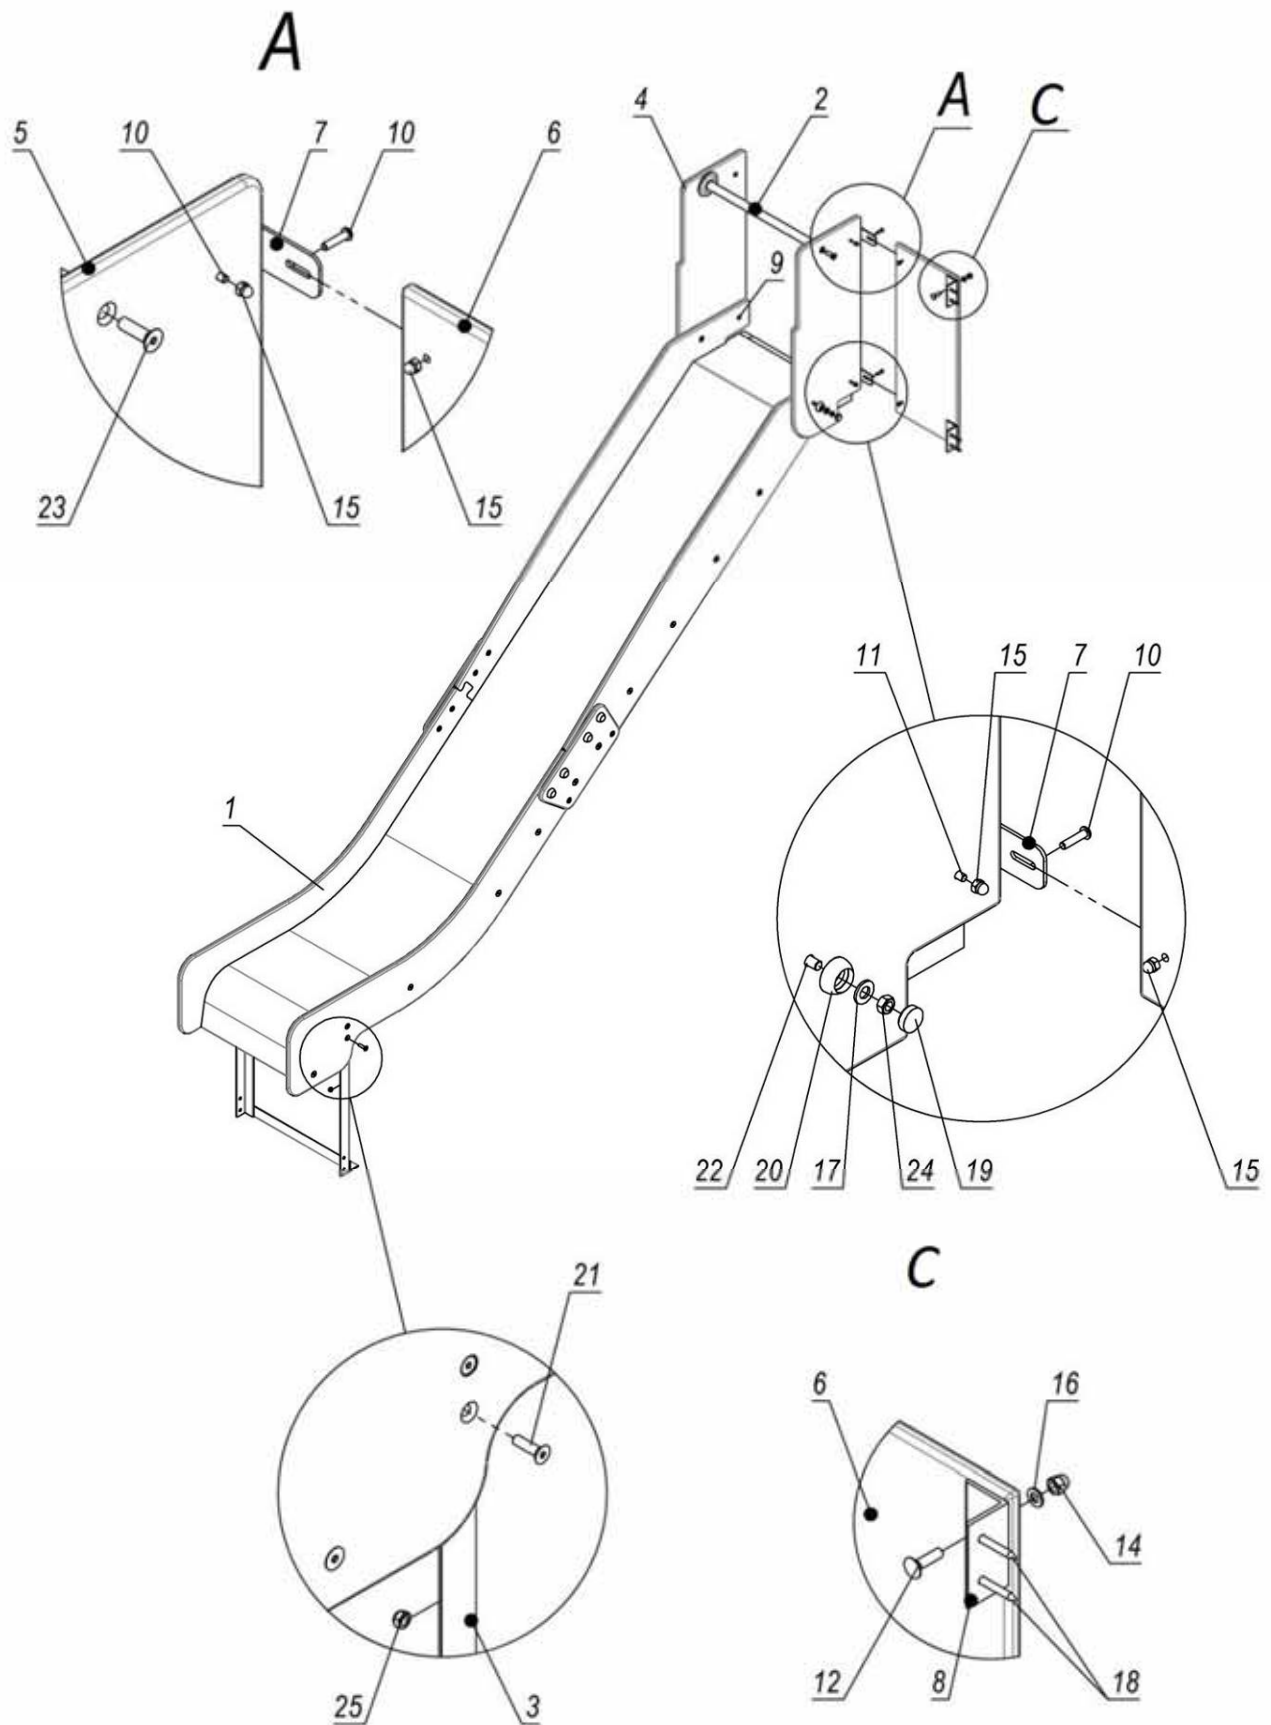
Batter for a multi-level tower assembly scheme (2x3M)
